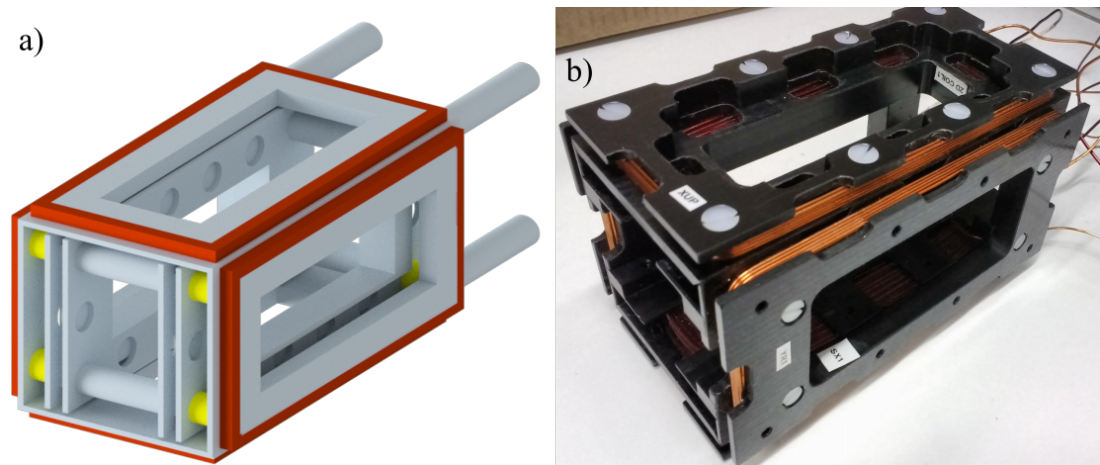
Magnetic field coils for the 2D+ MOT (2D quadrupole and shim coils). a) is a CAD drawing of the coils and b) shows the coils before being mounted on the chamber.
